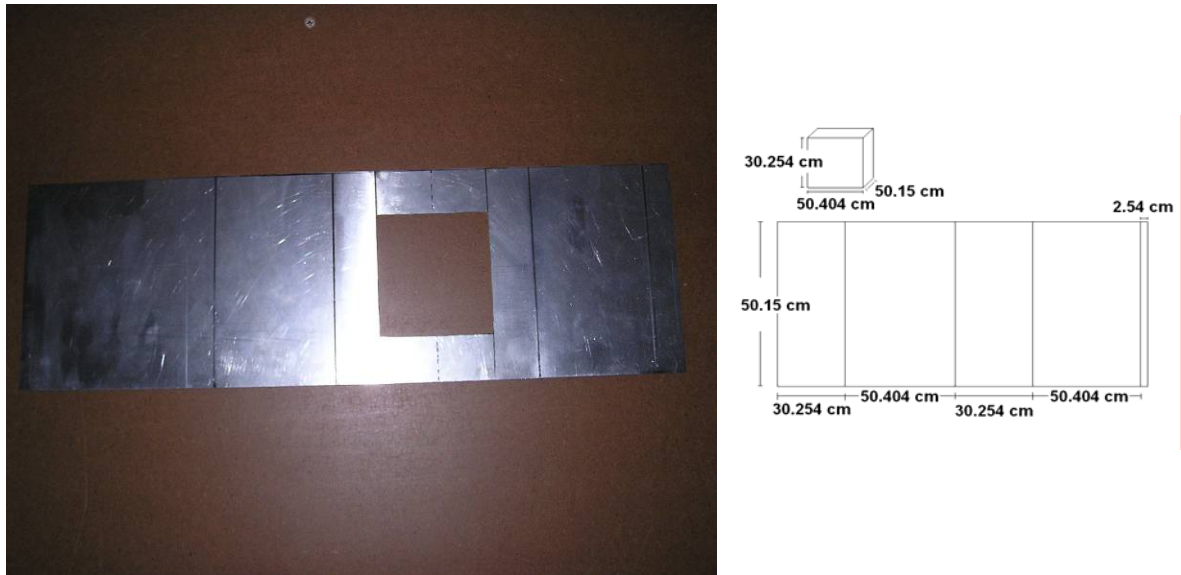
The constructed rectangular transmission section part (left); The rectangular transmission section part dimensions (right)
